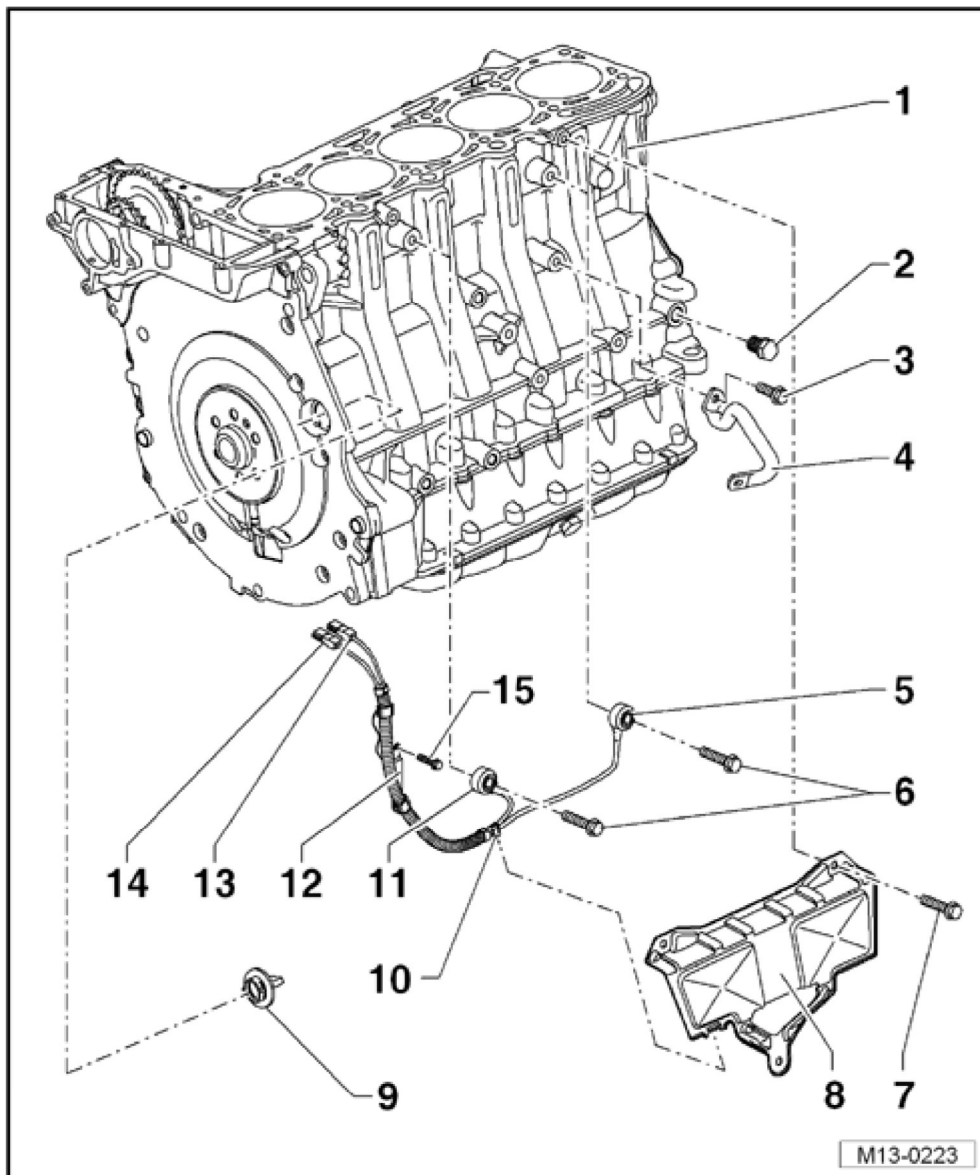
Attachments, Assembly Overview (Part III - Engine Rear)
